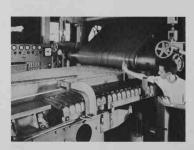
Technician checks thickness of wood fiber blanket (machine has been stopped). This four inch blanket will be compressed into a hardboard panel 1/4 in. thick. (Masonite Corp.)
